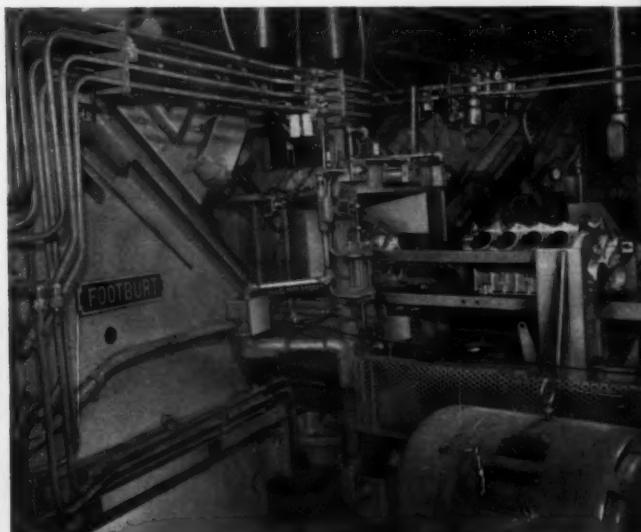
Valve-guide-bushing holes are drilled by this converted Foote-Burt transfer unit. Note the heavily shielded conduits that waterproof the electric wiring.
